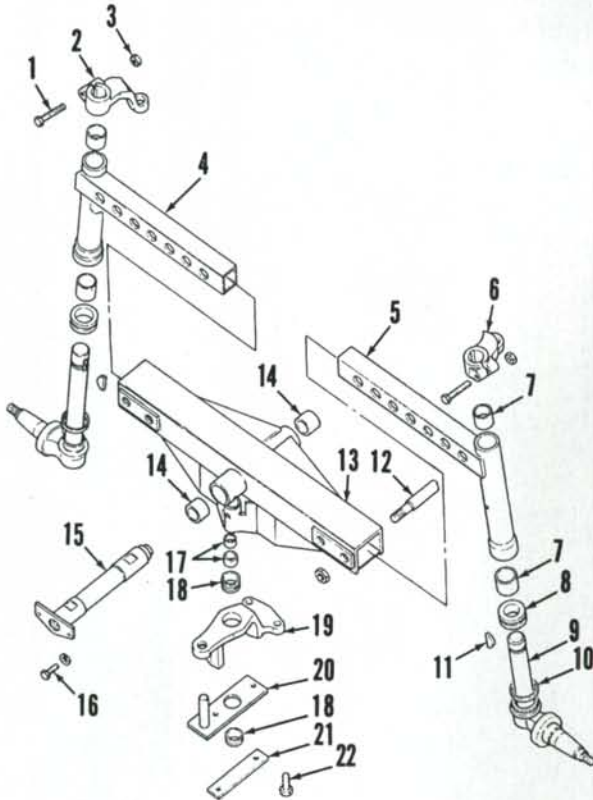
Exploded view of straight adjustable front axle used on some tractors.
